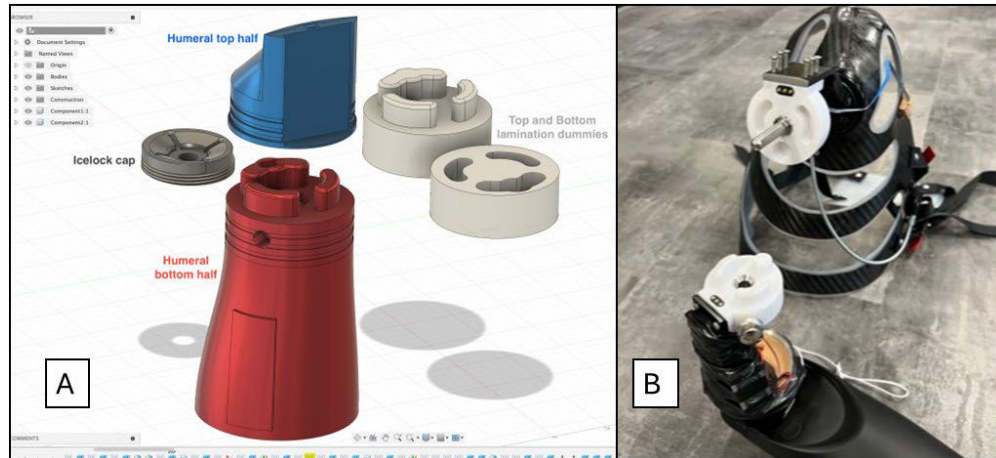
Design process for humeral disconnect. A) CAD drawings B) trial on test socket with components in place
